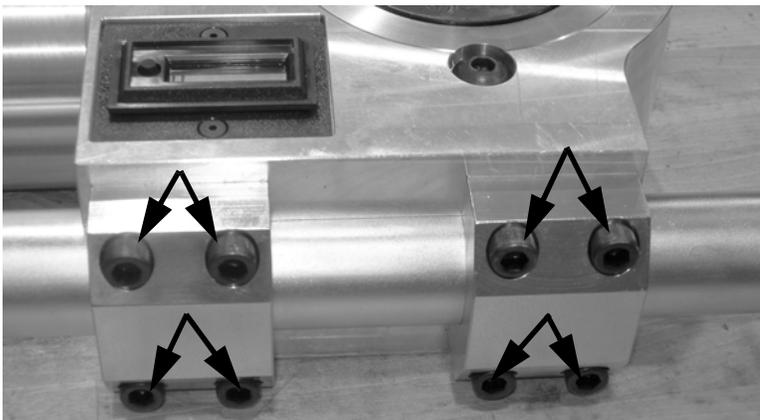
Remove the 8 screws holding the handle to the head assembly.
